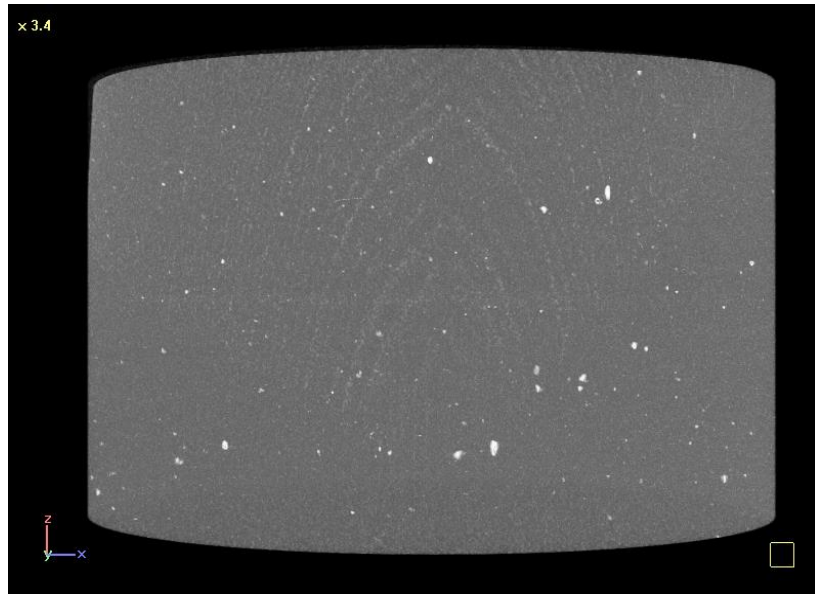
3D x-ray display of an O-ring section from a differently manufactured 6.99 mm O-ring, where the randomly distributed white specs are voids inside the O-ring cross-section.
